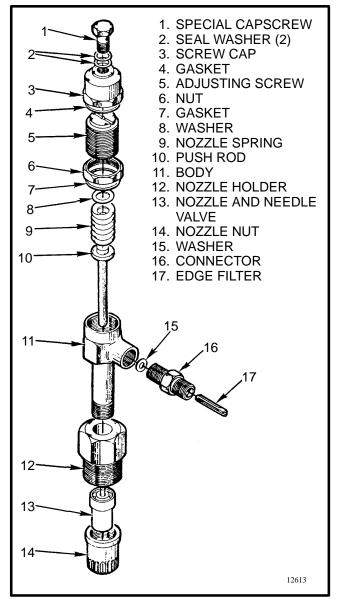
FUEL INJECTOR, DIESEL ENGINES
